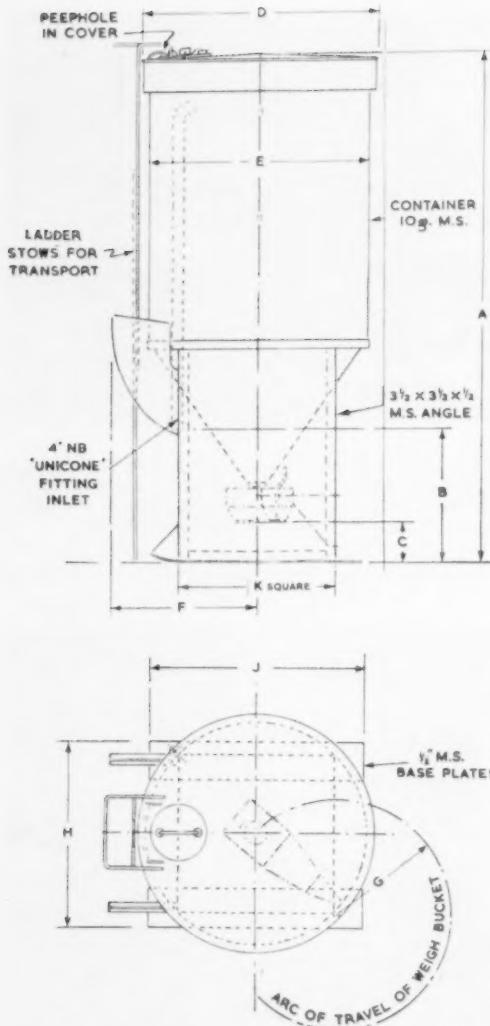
(above) Layout of typical Dumbo hopper and (below) typical dimensions.
